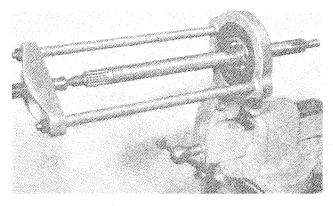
Removing Mainshaft Centre Bearing with Churchill Press No. S4221 and adapter from Set No. S4615.
